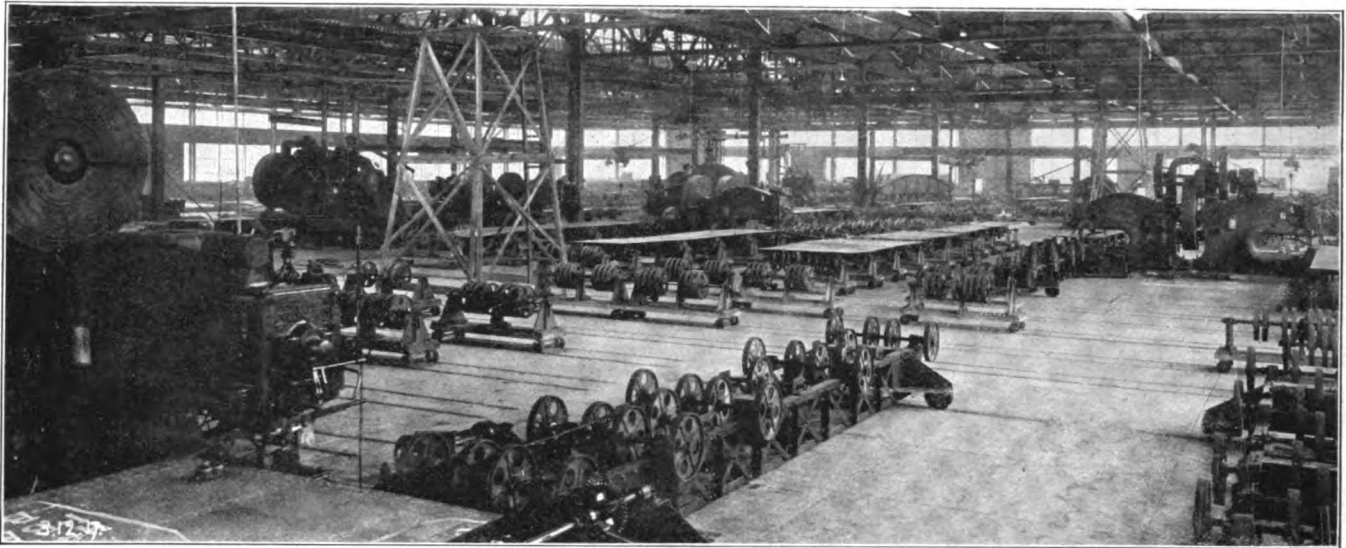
Modern Shipbuilding Plant—Completely Equipped with Hilles & Jones Machinery
